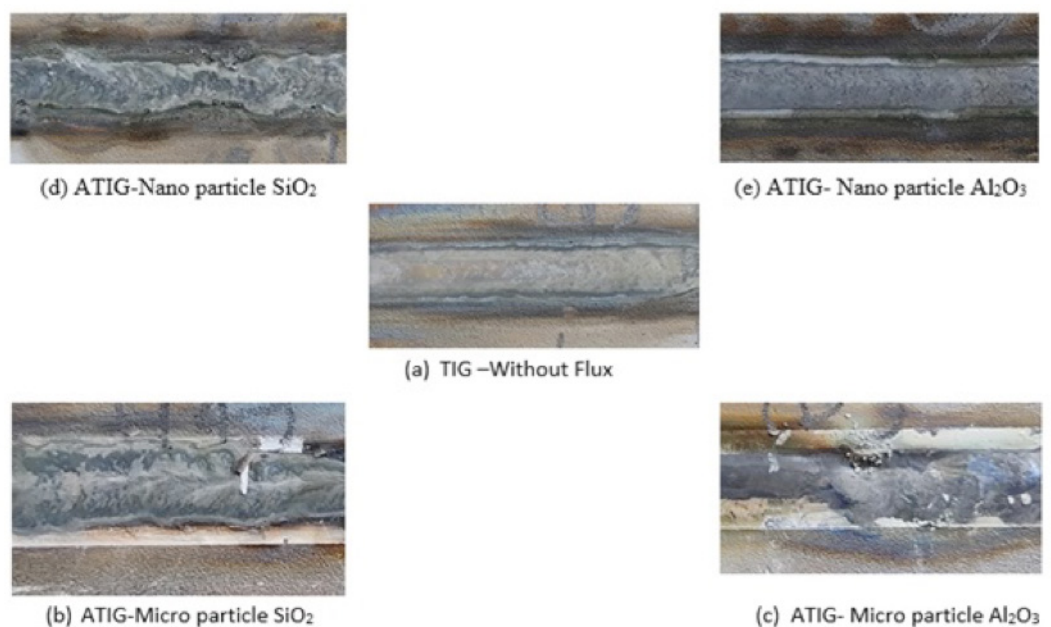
weld bead surface appearance of TIG and ATIG weld joint
